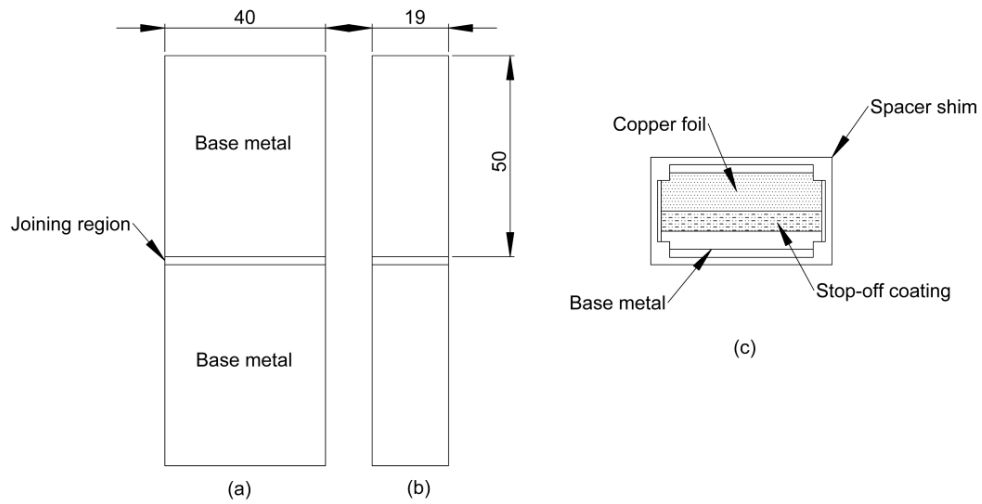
Brazing assembly (a) front view, (b) side view, (c) joining region top view (dimensions in mm)
